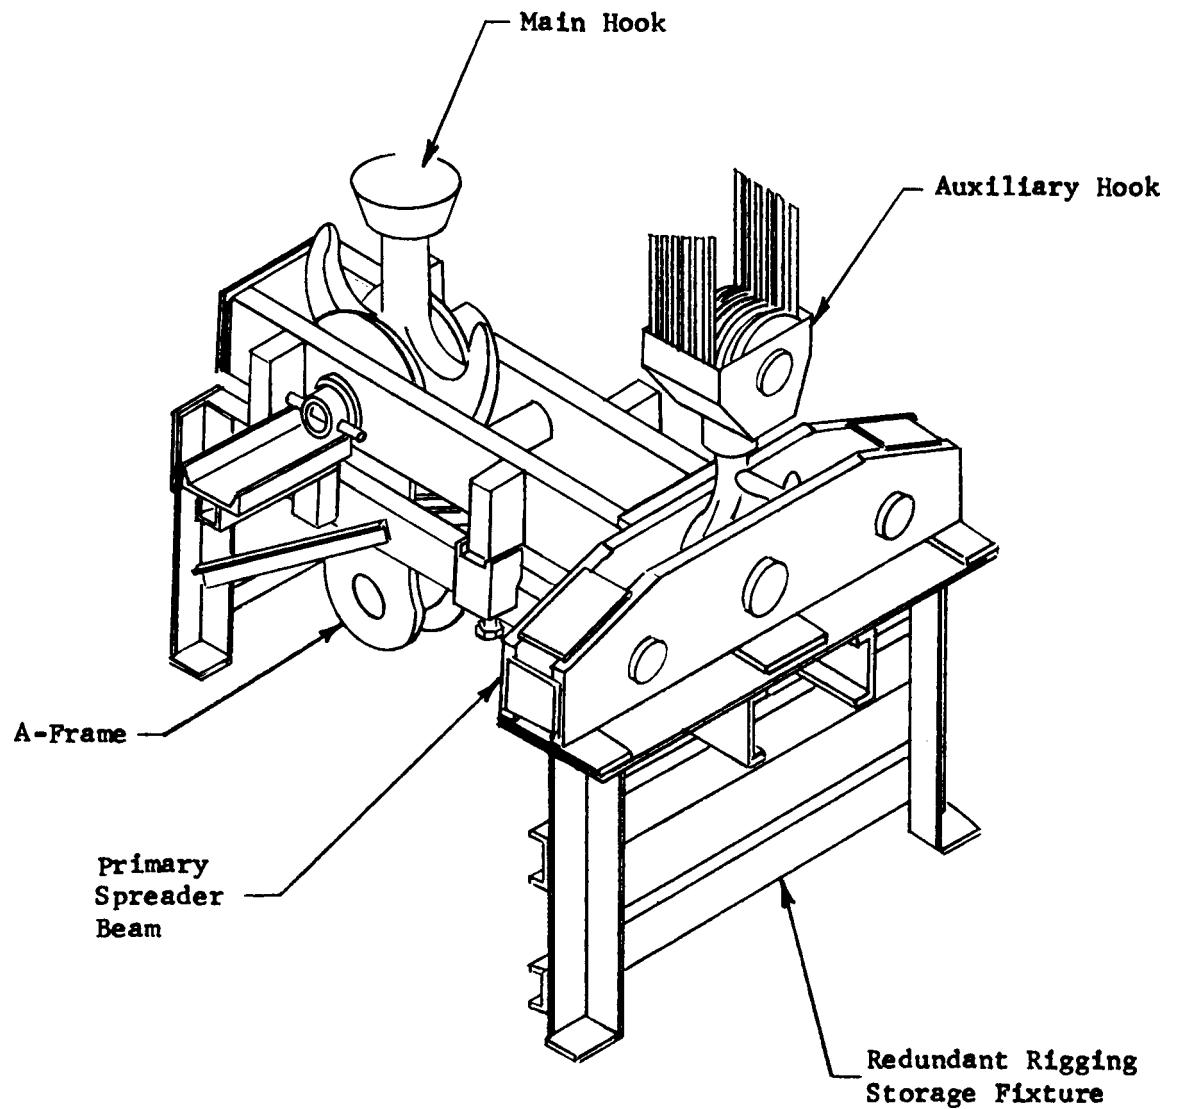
Peach Bottom Cask Redundant Rigging in Storage Fixture
